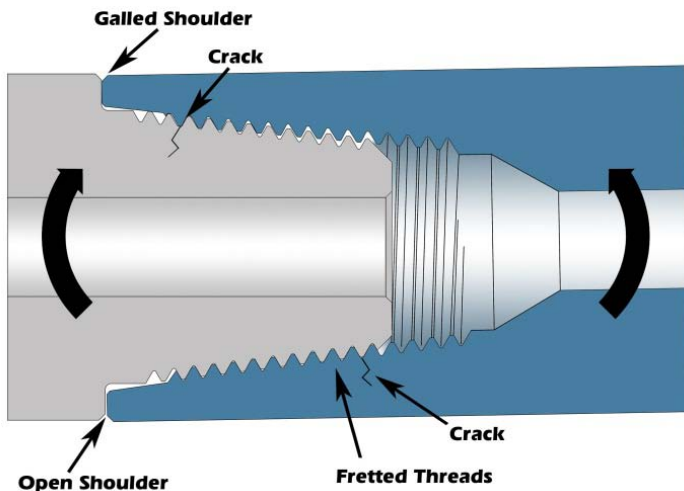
Diagram of a connection bending. Pin thread fretting, box stress cracks and bell mouthing result.
